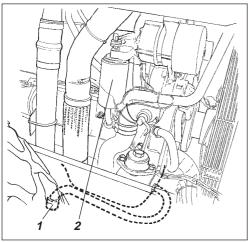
Left side of engine 1. Drain plug 2. Oil filter
